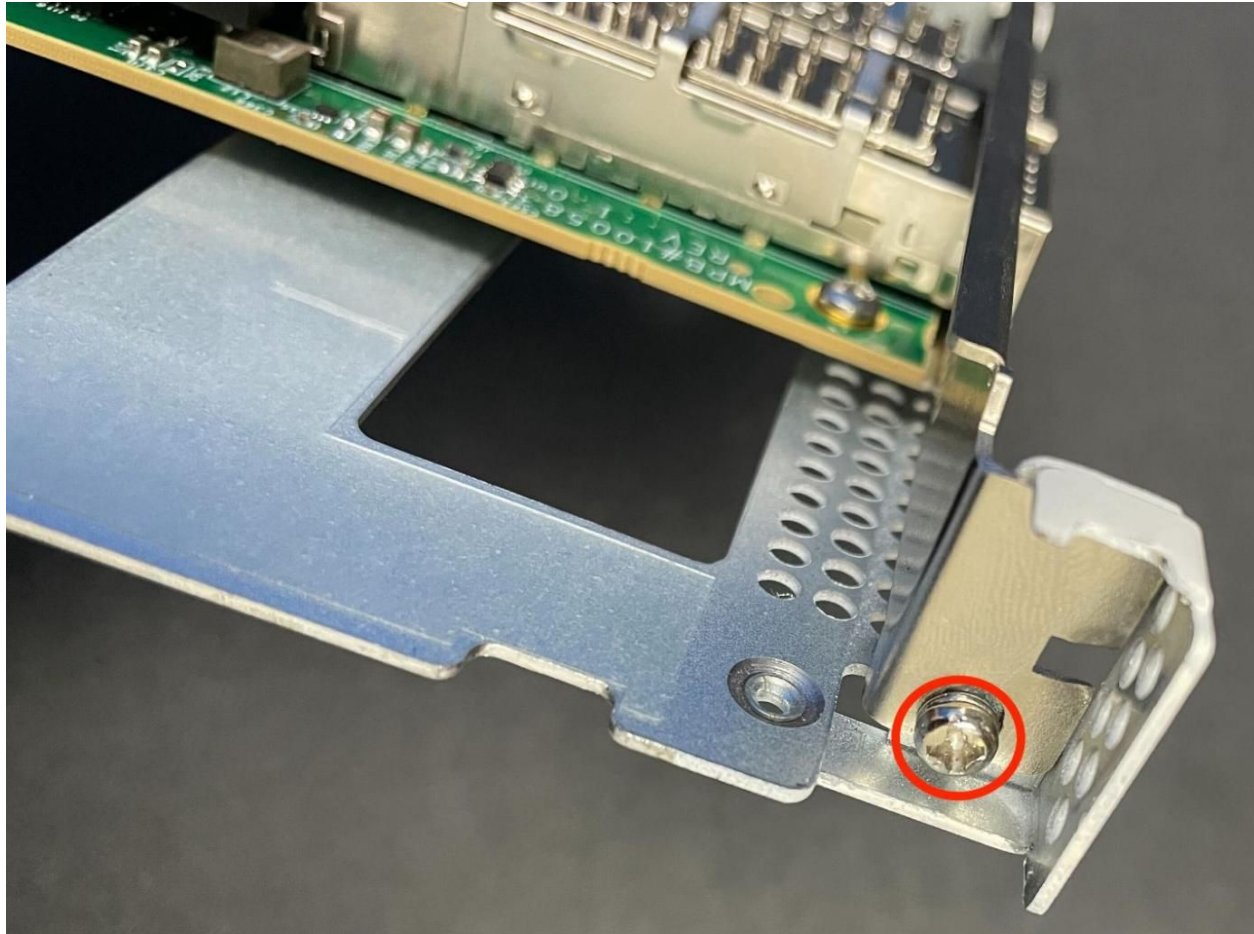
Expansion card fastened in the riser assembly using the retention screw
